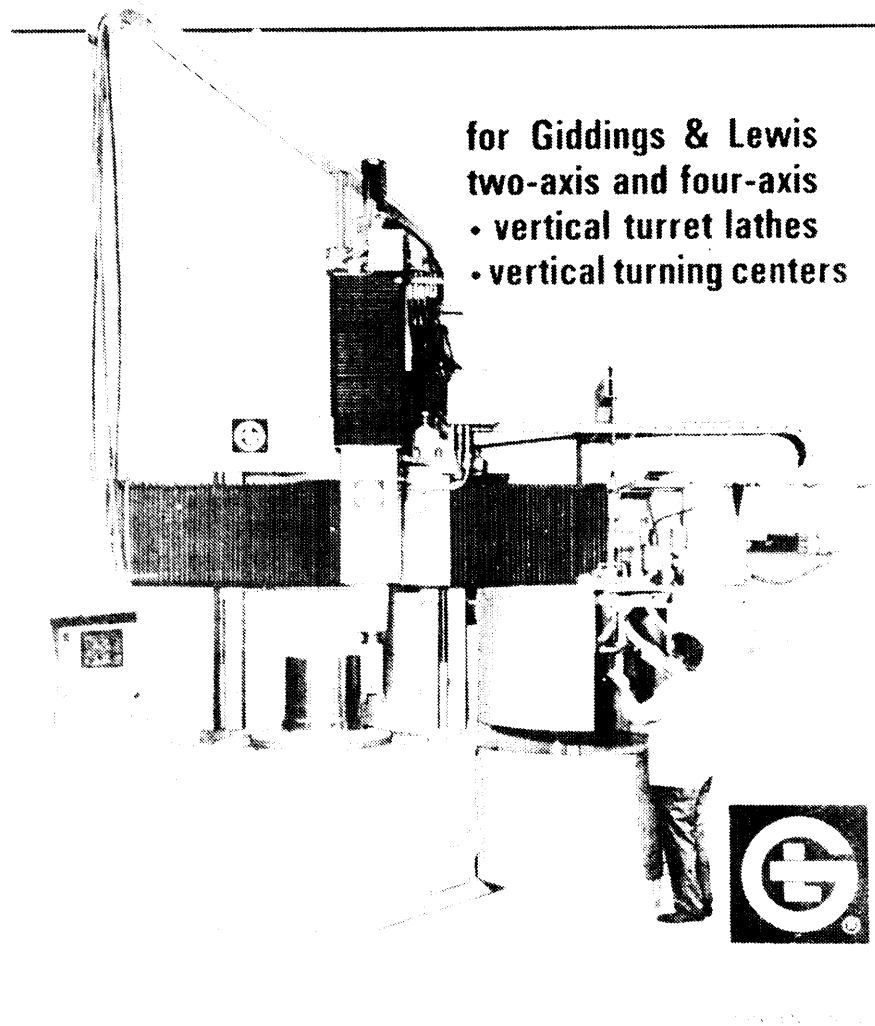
Two-axis, numerically controlled vertical boring mill with automatic tool changer. (Giddings & Lewis Machine Tool Company).
